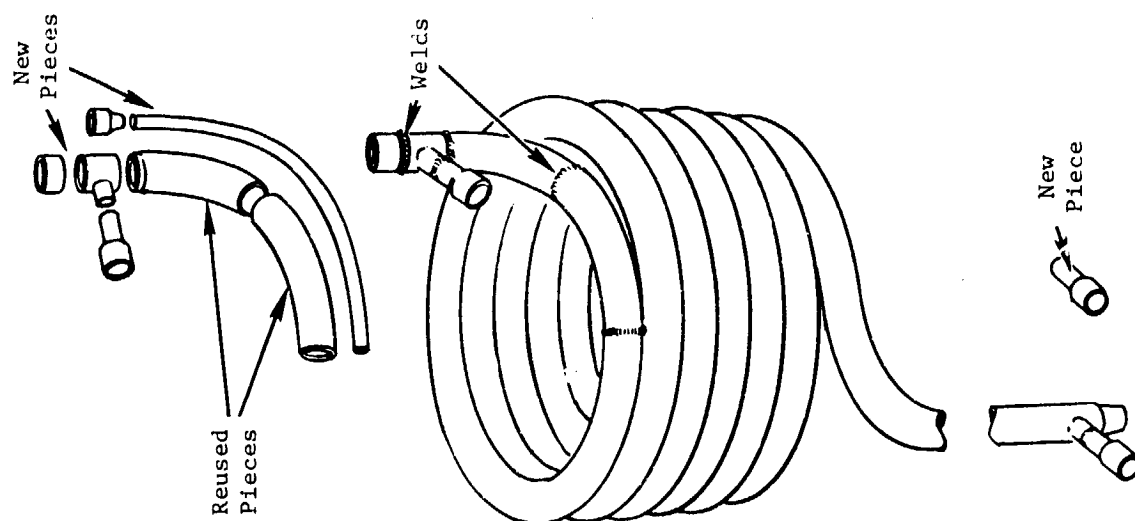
Top of the Boiler Following Final Repair Welding.
